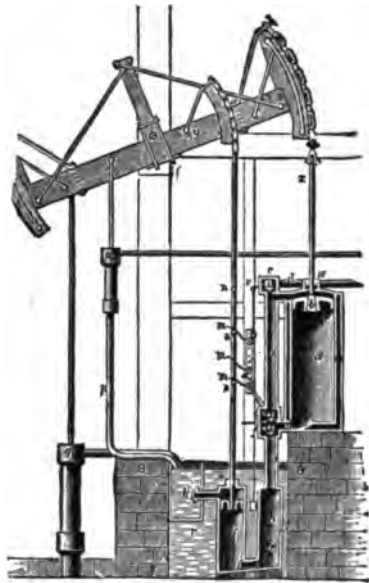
WATT'S PUMPING-ENGINE, A.D. 1769.
